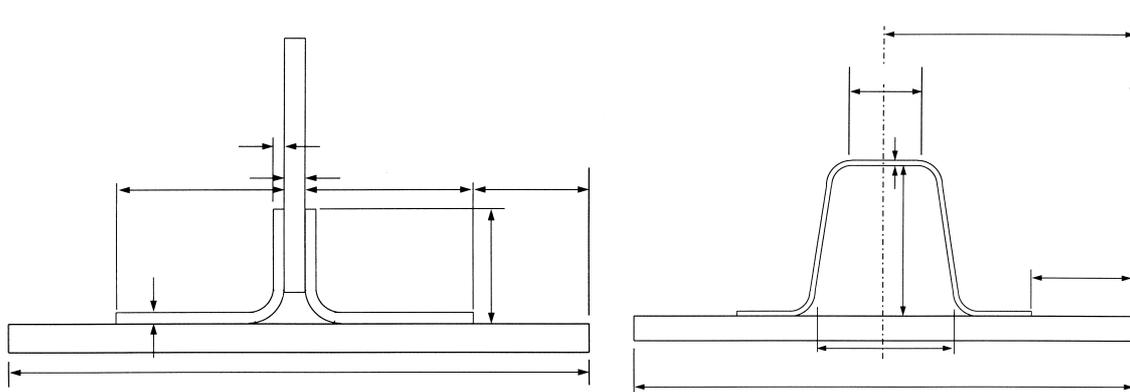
Schematic of T-joints and top hat stiffener specimens used in the study
